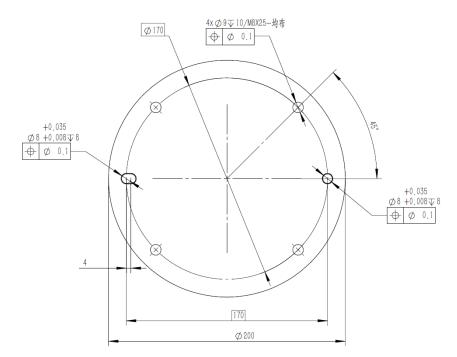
Dimensions of installation holes on the base, with unit of mm
